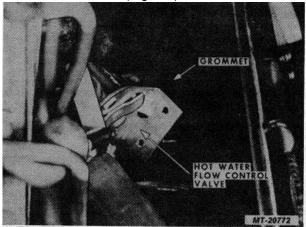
Removing Hot Water Flow Control Valve from Unit Housing
